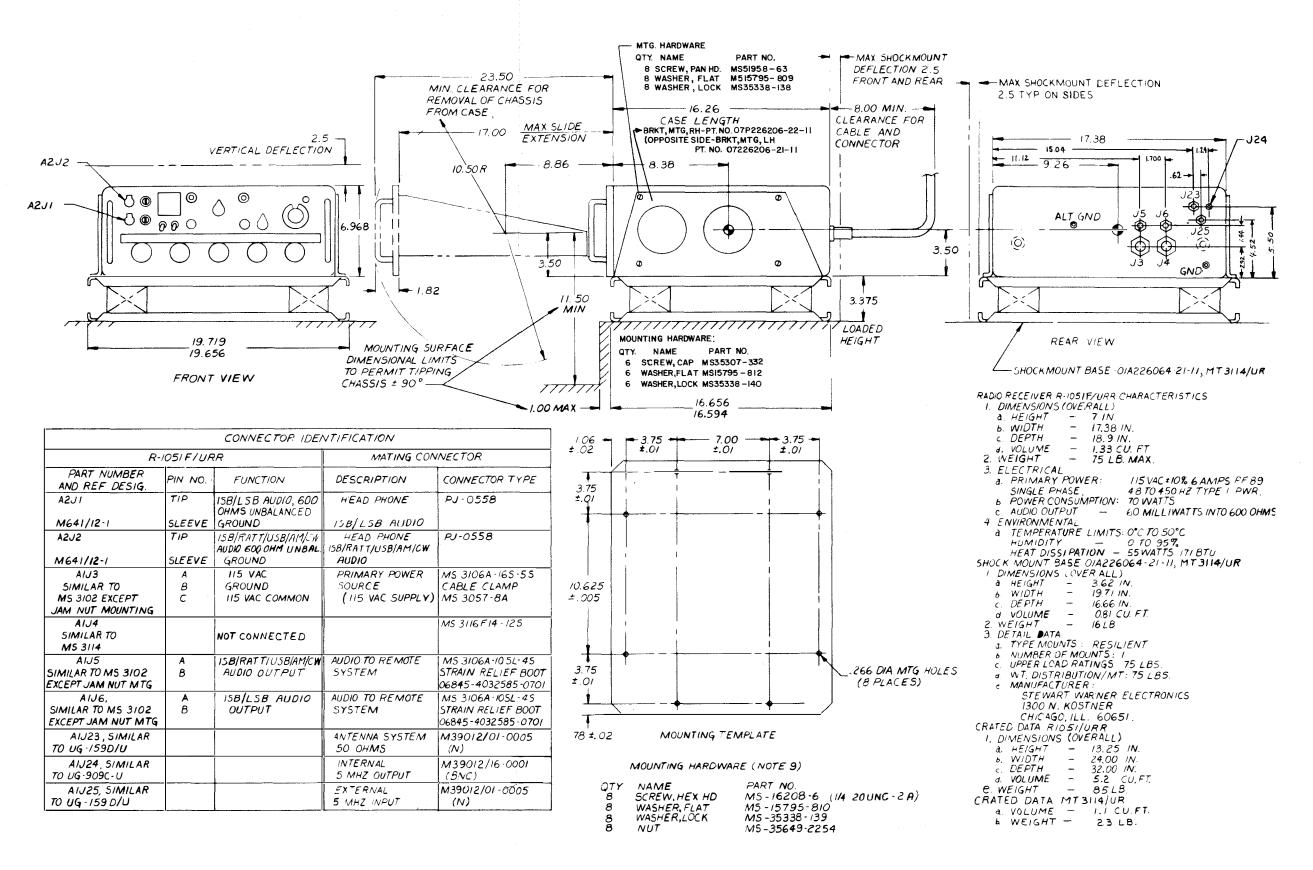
Radio Receiver R-1051G/URR, Outline and Mounting Dimensions (Sheet 1 of 2)
